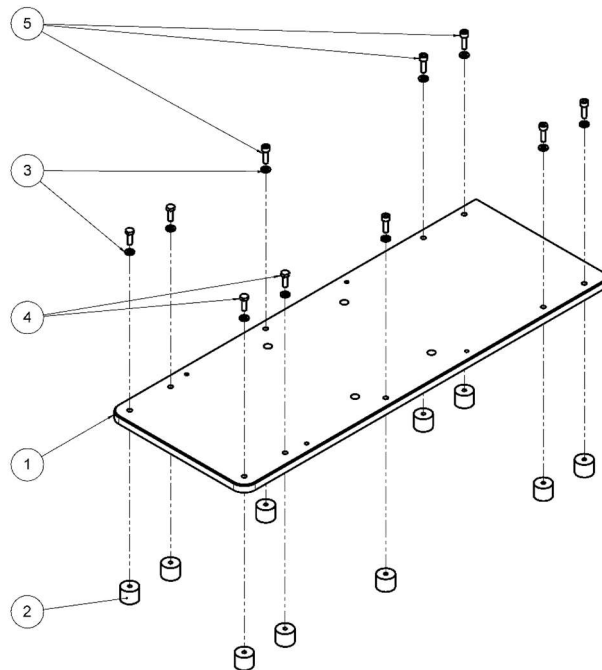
Base plate PQ5E, PQ5E-HT, PQ5E-Q sub-assembly
